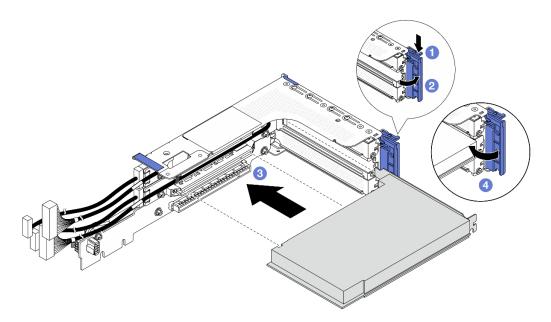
Installing a PCIe adapter on the 3FH riser cage
